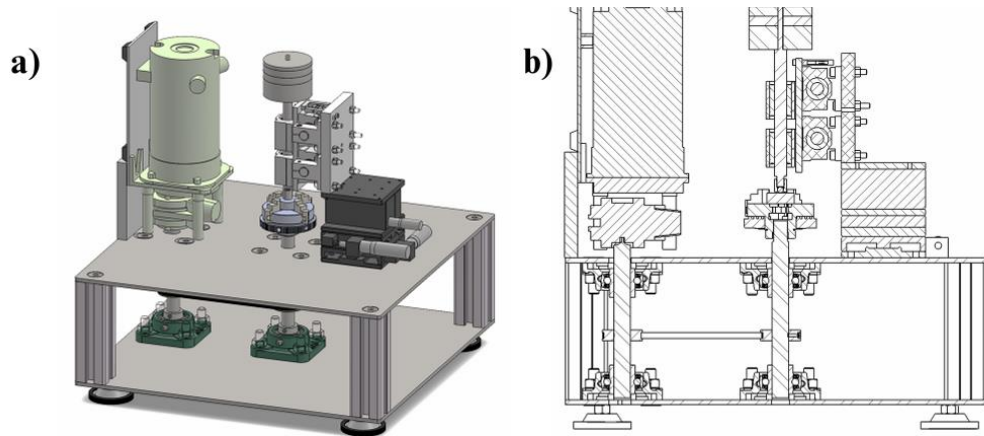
a) Isometric view of the general assembly. b) Cross Sectional View
